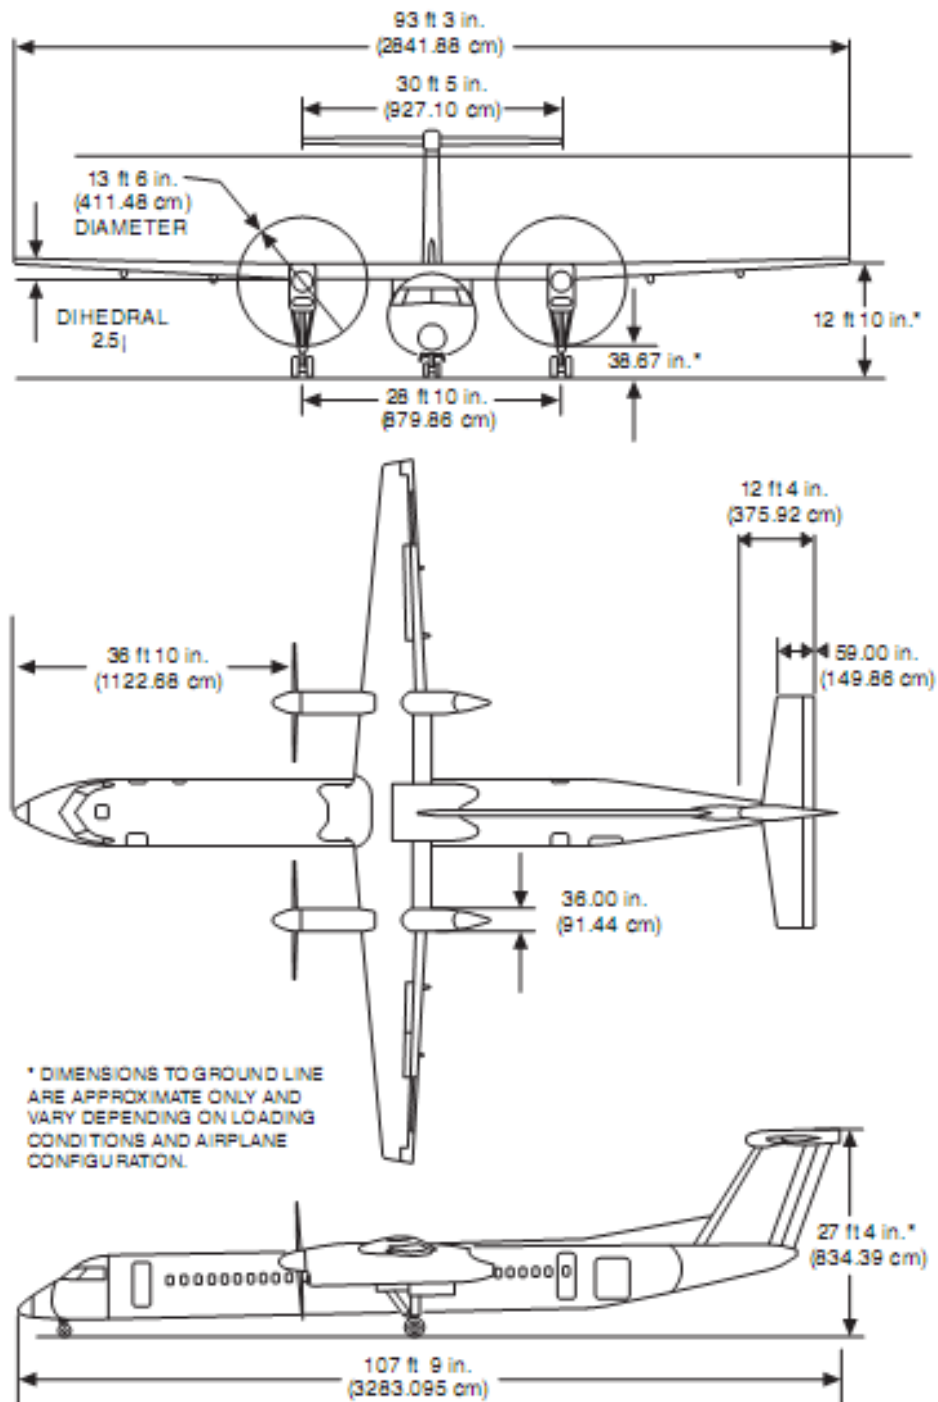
Bombardier Q400 Fuselage Dimensions
